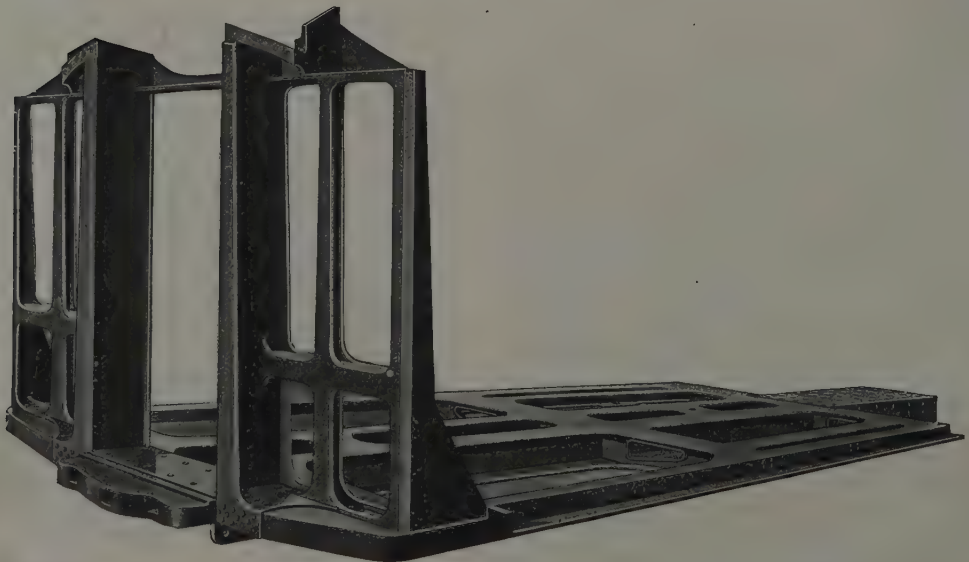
Commonwealth Steel Company's Upright End Frame in One Piece, and Commonwealth Combined Platform and Double Body Bolster for Non-Vestibule Cars.
